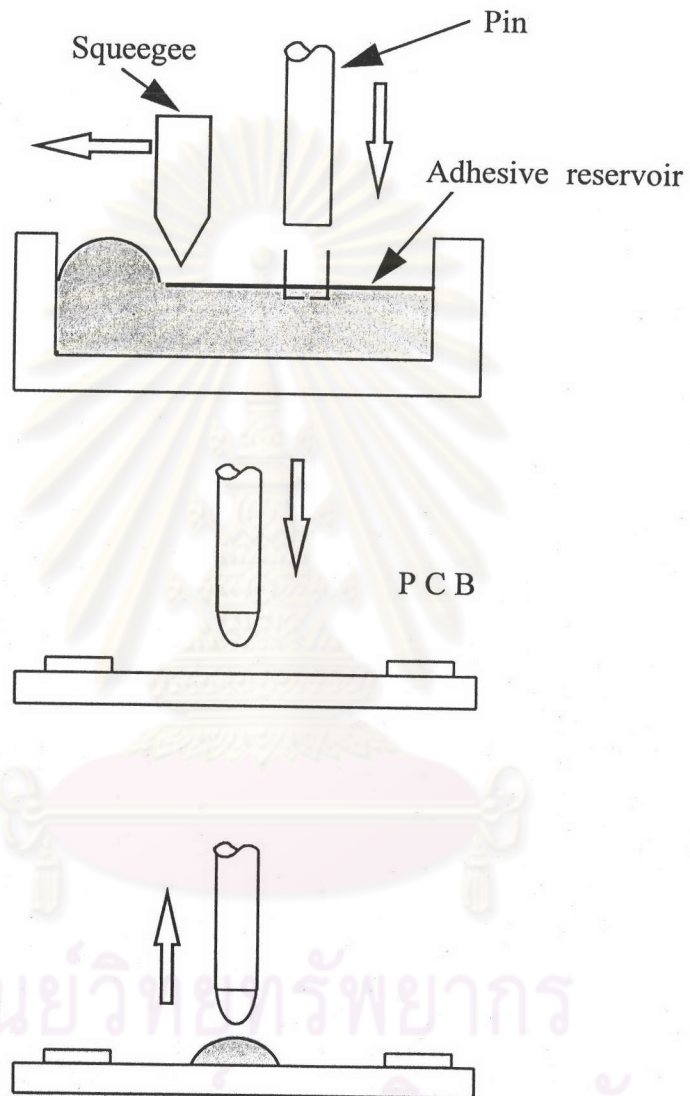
Pin Transfer Epoxy Adhesive Applied Technique
